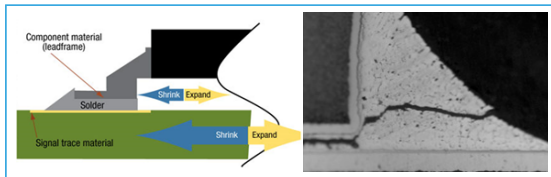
Failure Mechanisms by Solder Fatigue[11]
